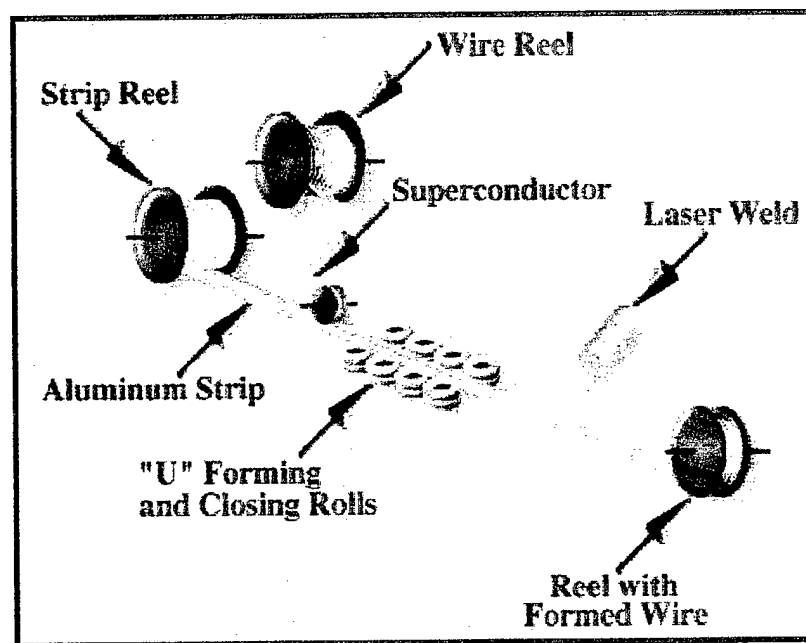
Schematic of linear wrapping and welding.
